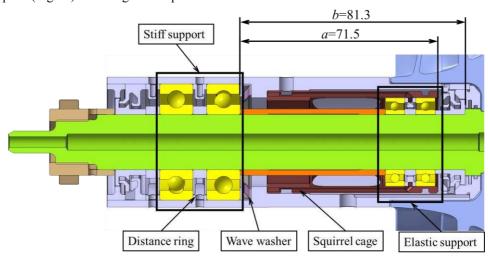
Bearing assembly of jet engine with one stiff and one elastic support
